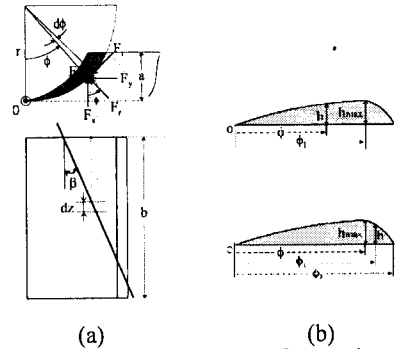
(a) Coordinate system for cutting force components and (b) spread undeformed chip cross-sections in up-end milling.
